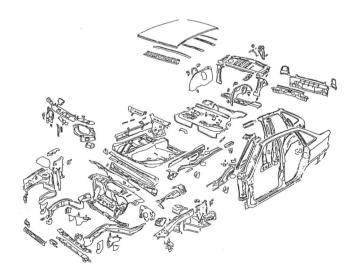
Body stampings. (Courtesy of General Motors Corporation)
